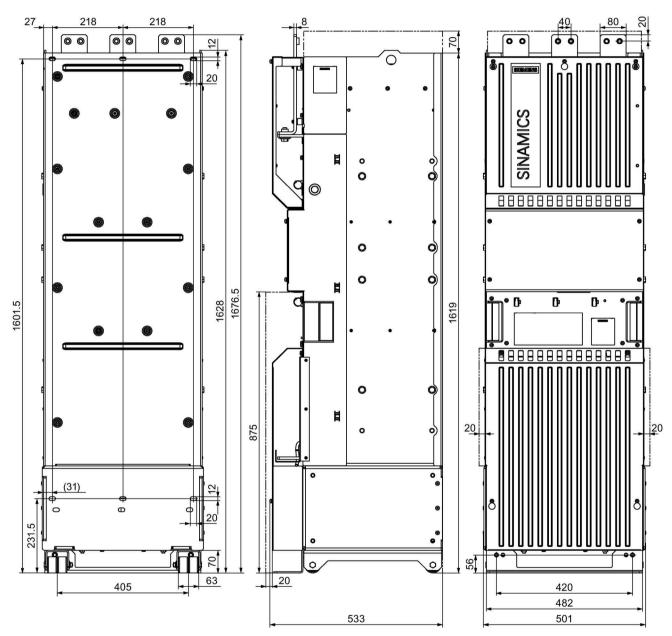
Dimension drawing Active Interface Module Chassis-2. Rear view, side view, front view
